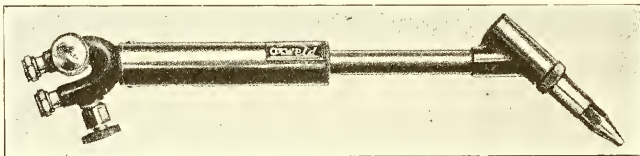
The Oxweld Low-Pressure Welding Torch.
